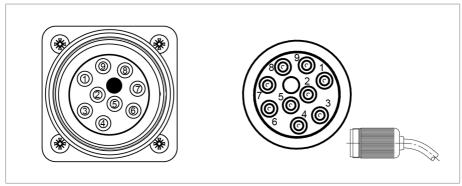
ANSI plug on the device (left); Connecting cable with ANSI socket (right)
